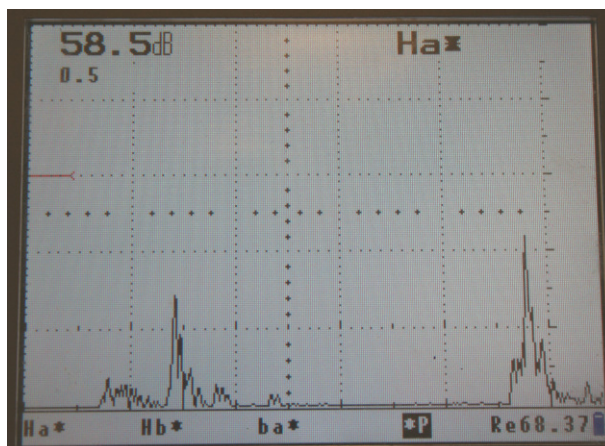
The view of the ultrasonic pulses obtained during the test of welded joint - visible pulse coming from the bottom of the tested weld – USM 35XS flaw detector
